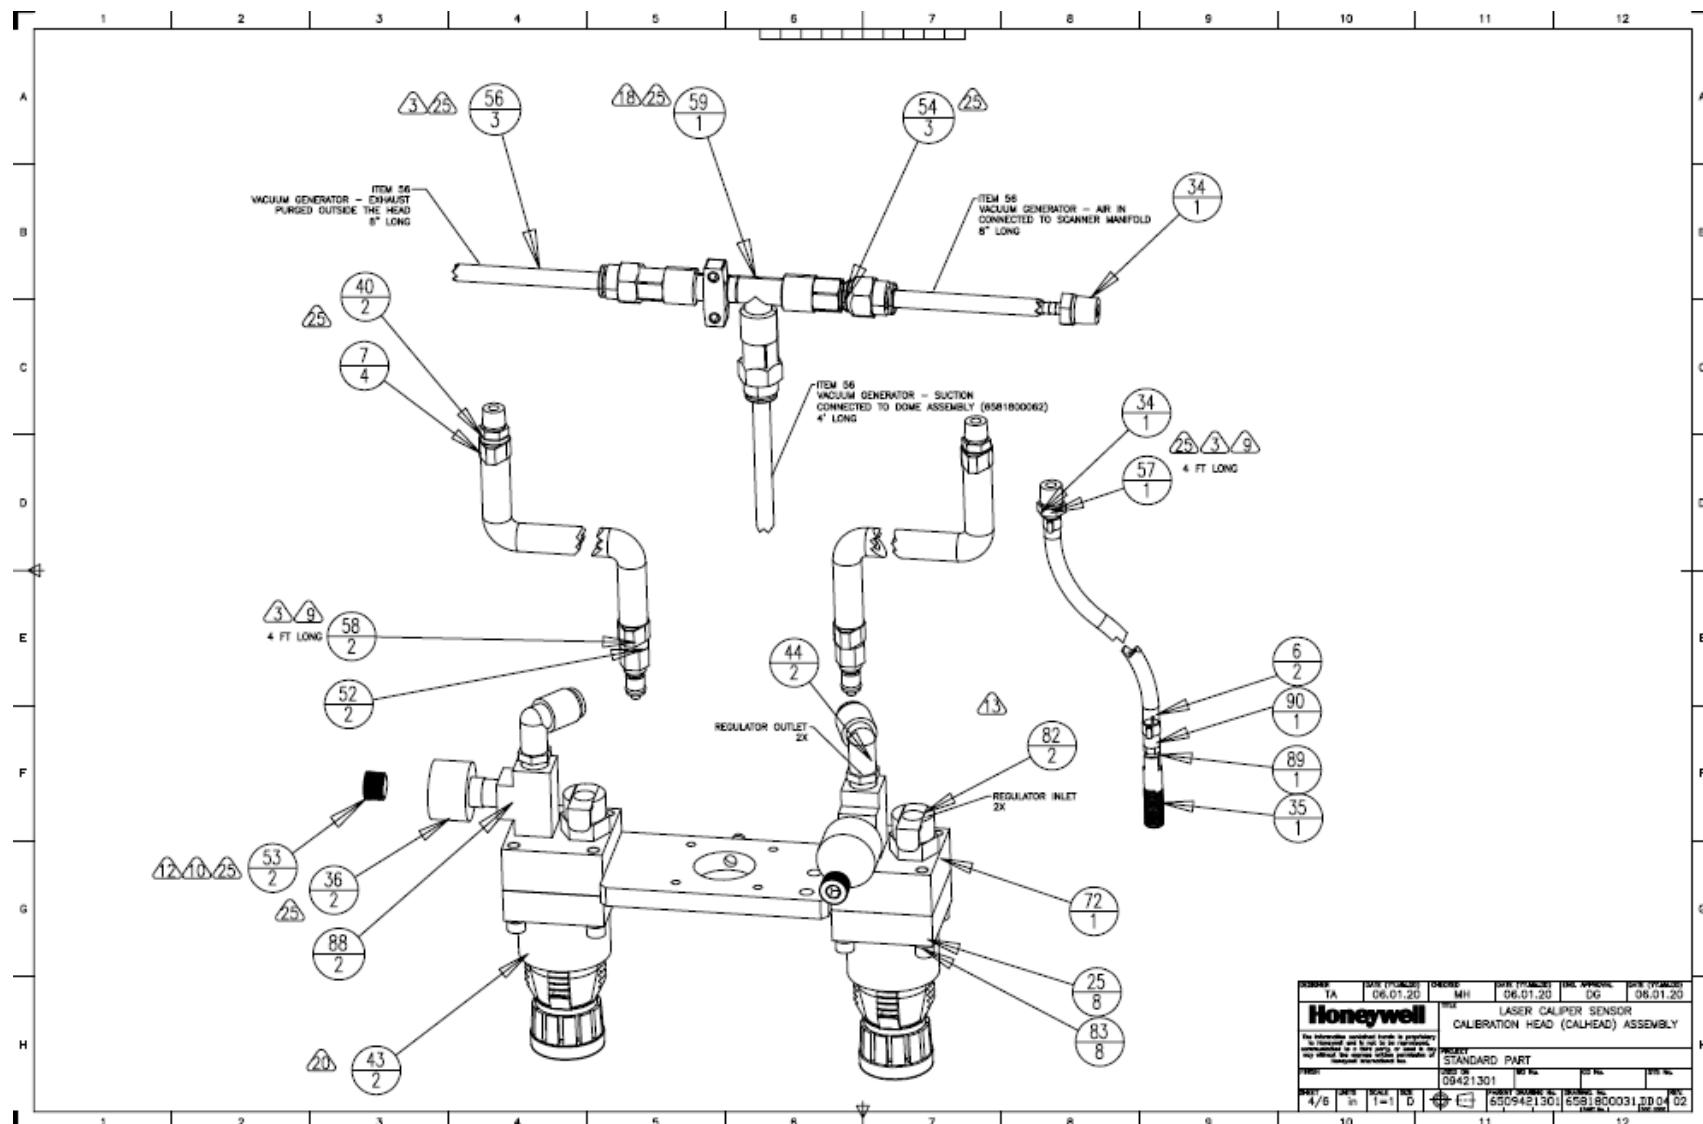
6581800031: laser caliper sensor cal-module assembly (4/6)
